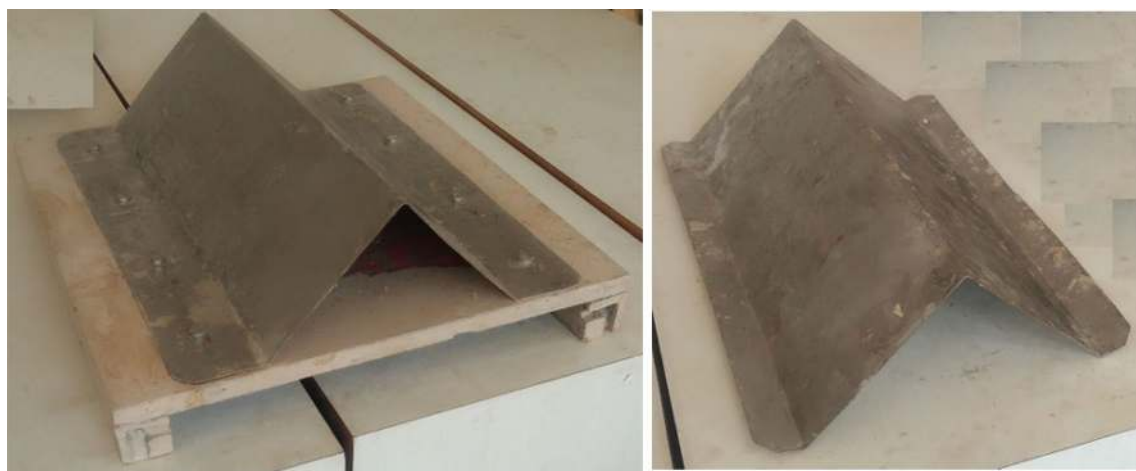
Photographs showing bottom V-tool plate (left) and top V-tool plate (right)
